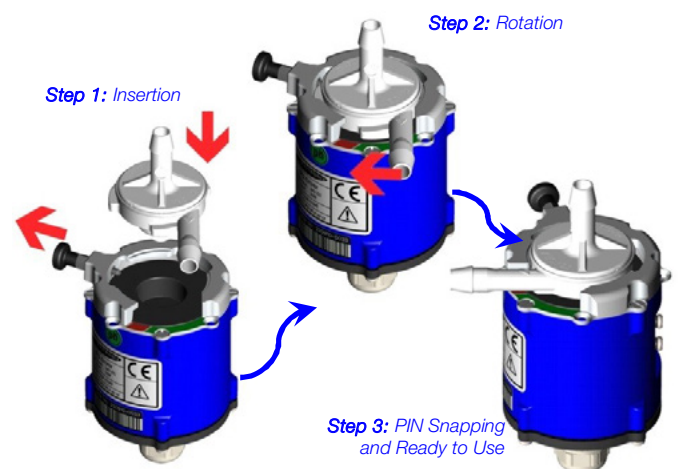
Intuitive 3-step pump head mounting procedure with bayonet type socket (PHS-i30.1)
